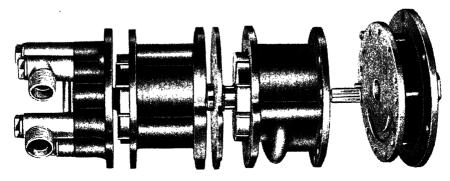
Interior construction of engine-driven compressor, Mk. I, type c
